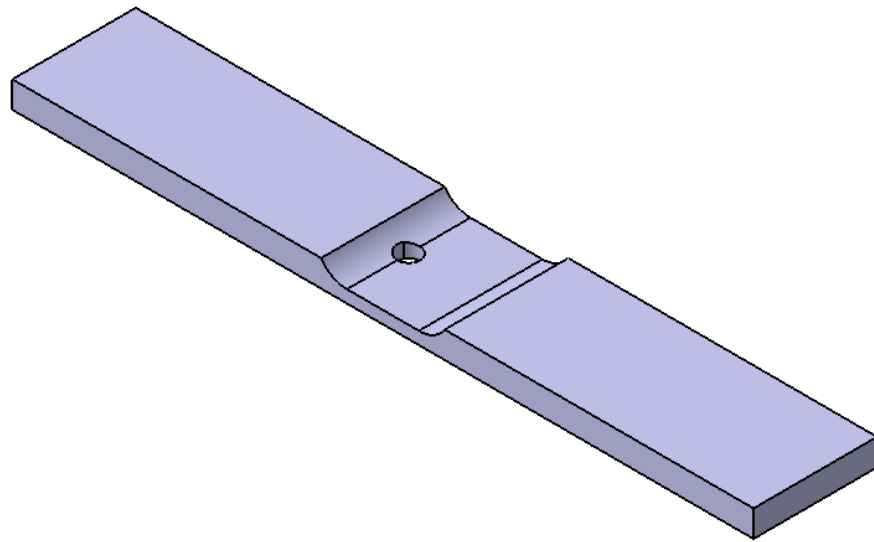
Open Hole in Radius Fatigue Test Specimen - Isometric View
